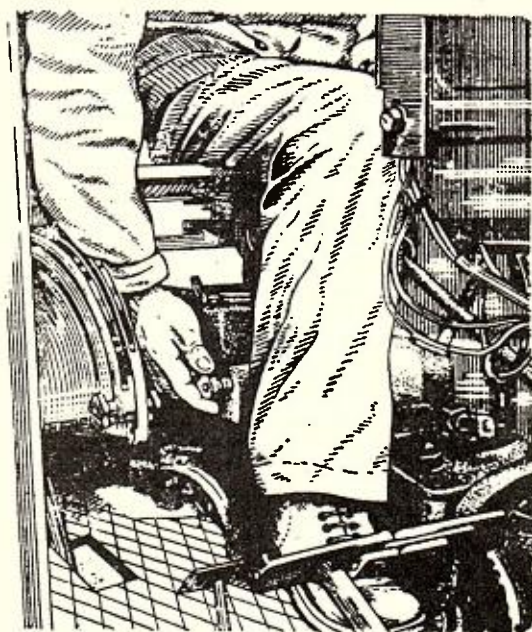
10 Screwing lowering speed adjusting knob in
